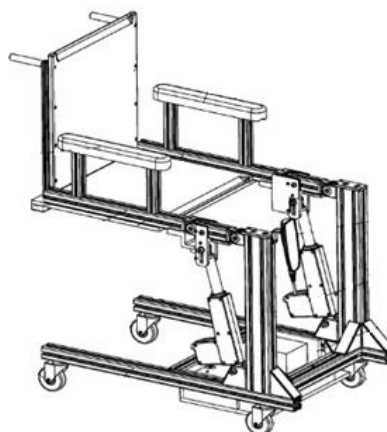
Sketch of wheelchair with removable seat (adapted from [39]).
